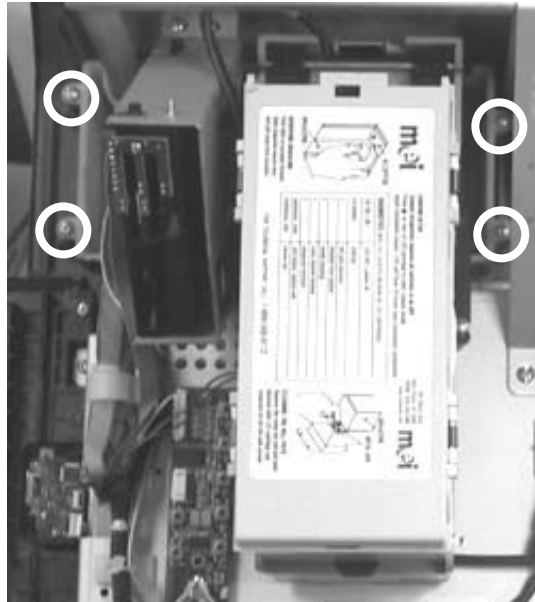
LOCATION OF 4 SCREWS SECURING COIN & BILL ACCEPTOR BRACKET
